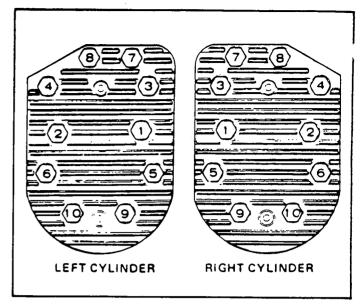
HEAD BOLT TIGHTENING SEQUENCE
